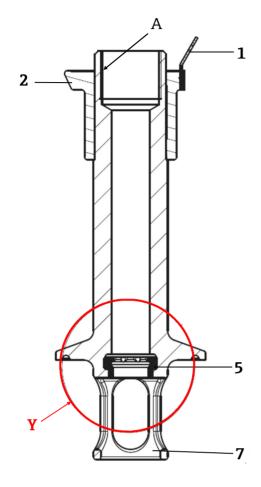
Sectional drawing CPA842 DN25 standard (version w/o sensor protection)
